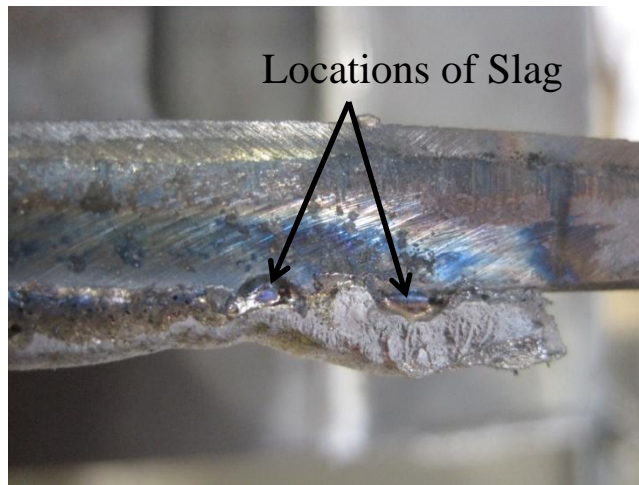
Slag Inclusion in Fillet Weld (Schematic)
